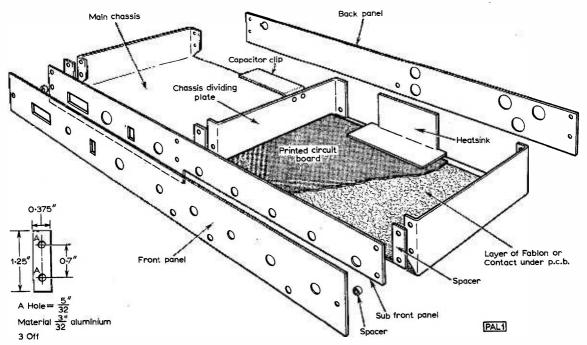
Exploded view of the metalwork. Note the addition of the three metal strip spacers introduced between the sub front panel and chassis. These have been introduced to facilitate easier mounting of the printed circuit board.
